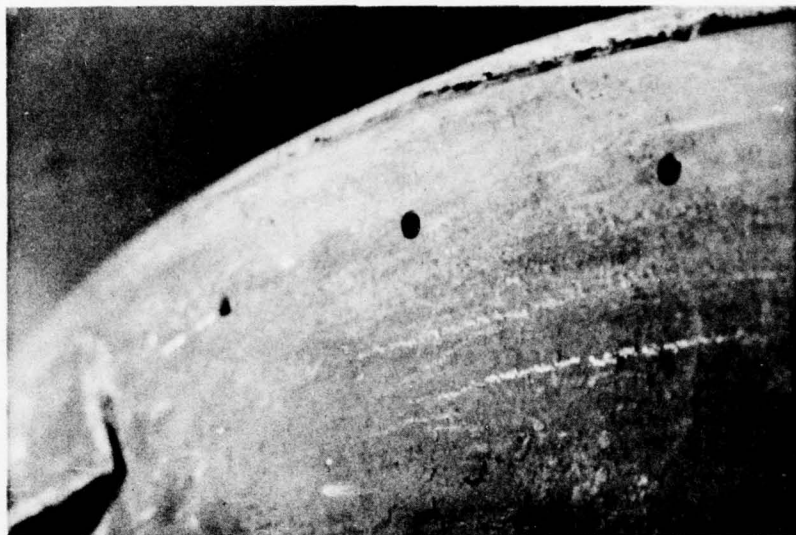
Holes in perimeter of auger flight to supply combustion air.
